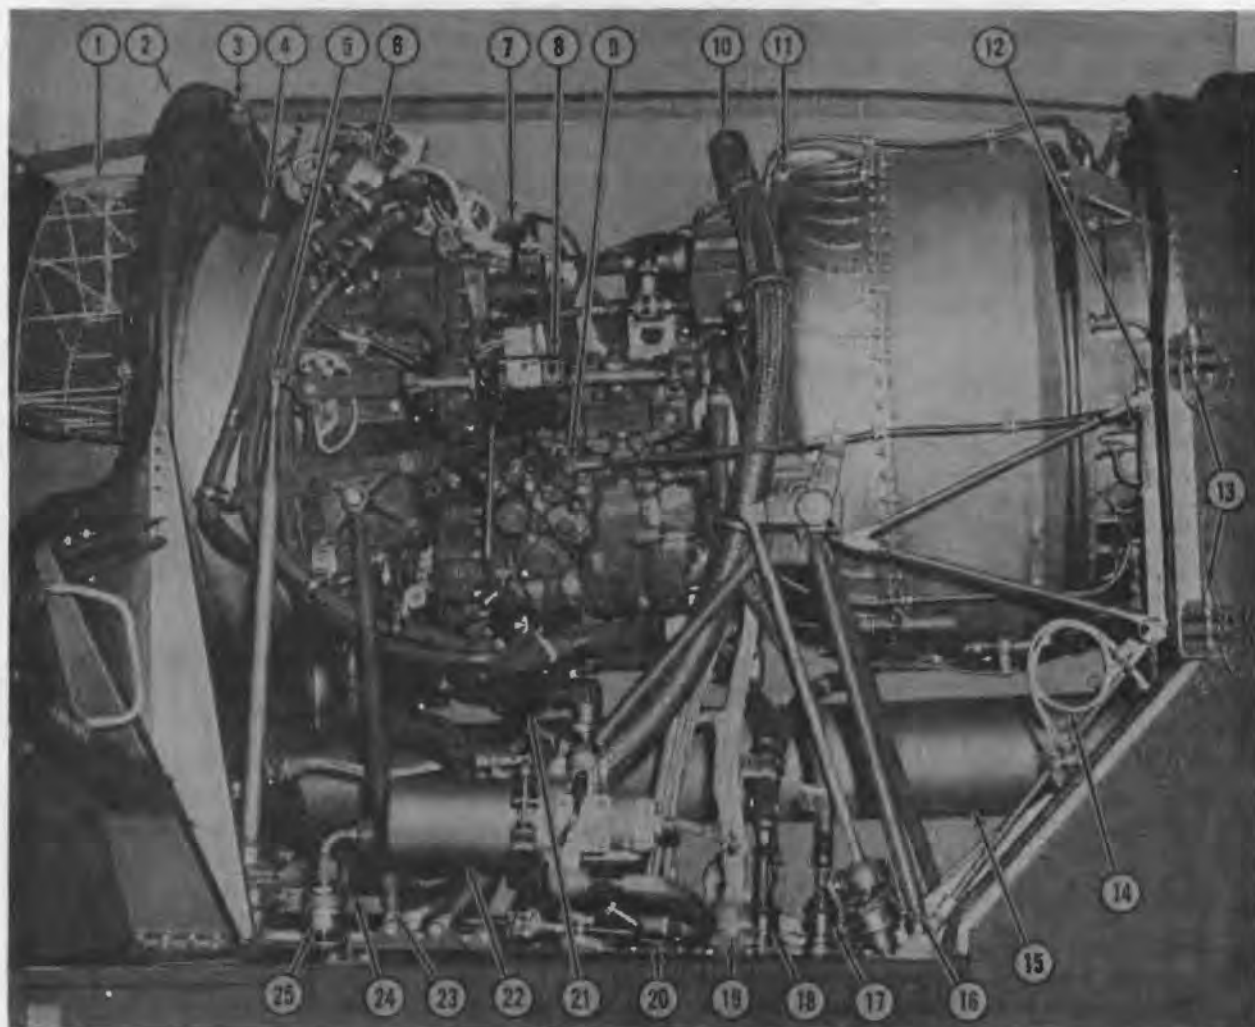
UH-1A Power plant installation — LH side (typical (Sheet 1 of 2))
